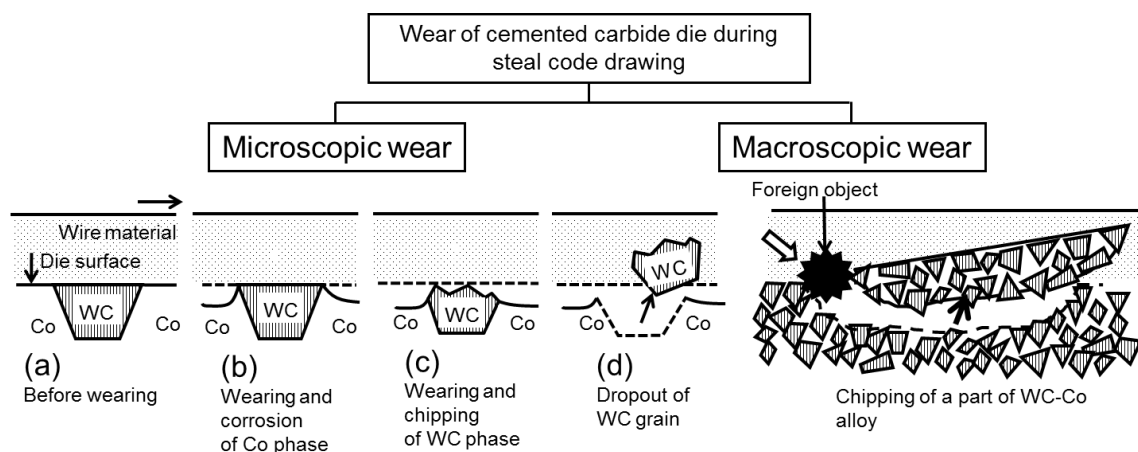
Schematic illustration of the wearing mechanism of cemented carbide dies for steel wire drawing.
